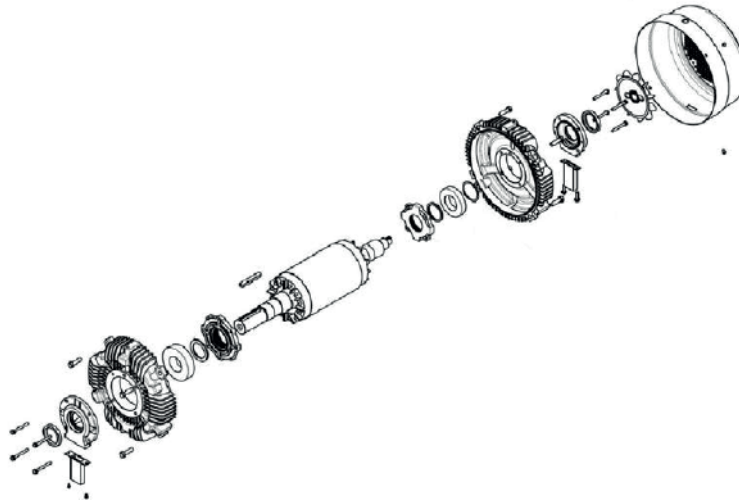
Rotor assembly (active part, shaft, bearings, end shields, fan)
